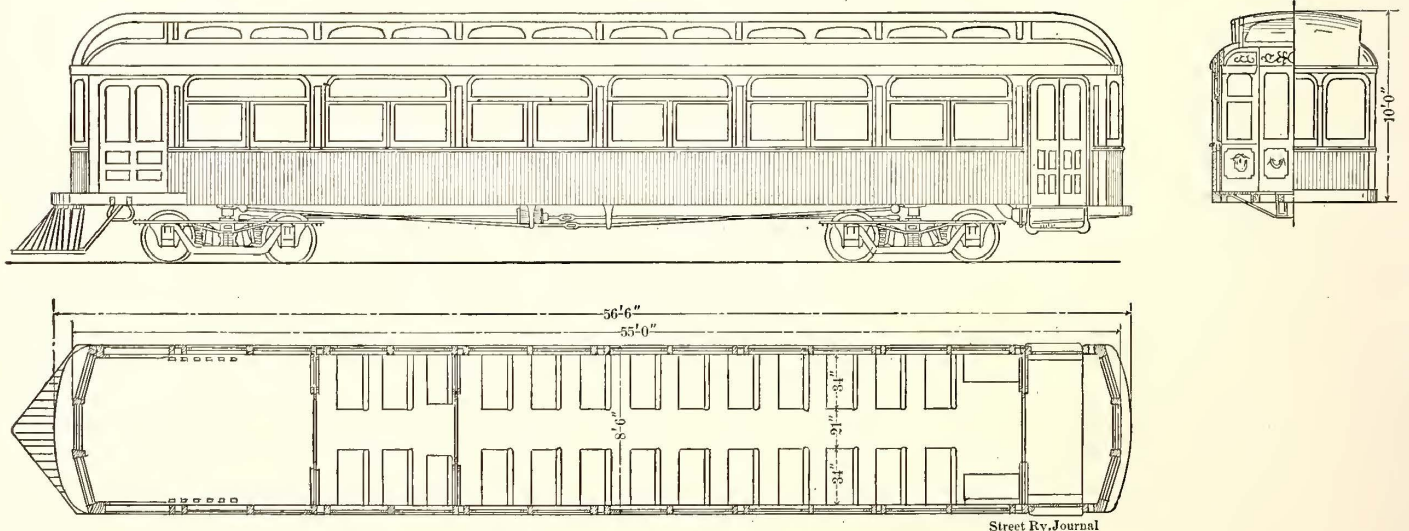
PLAN AND SIDE ELEVATION OF BAGGAGE AND PASSENGER CAR, CANTON & AKRON RAILWAY
